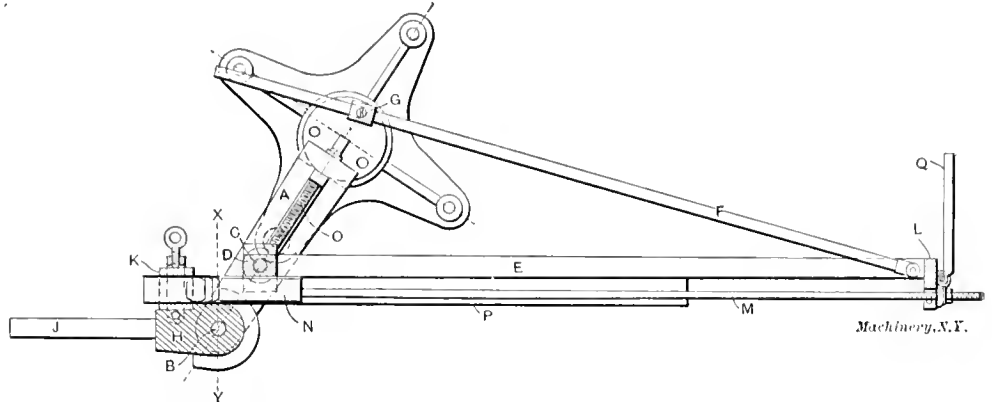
Plan View of Machine, showing Forming Dies and Method of Holding the Articulated Mandrel.
